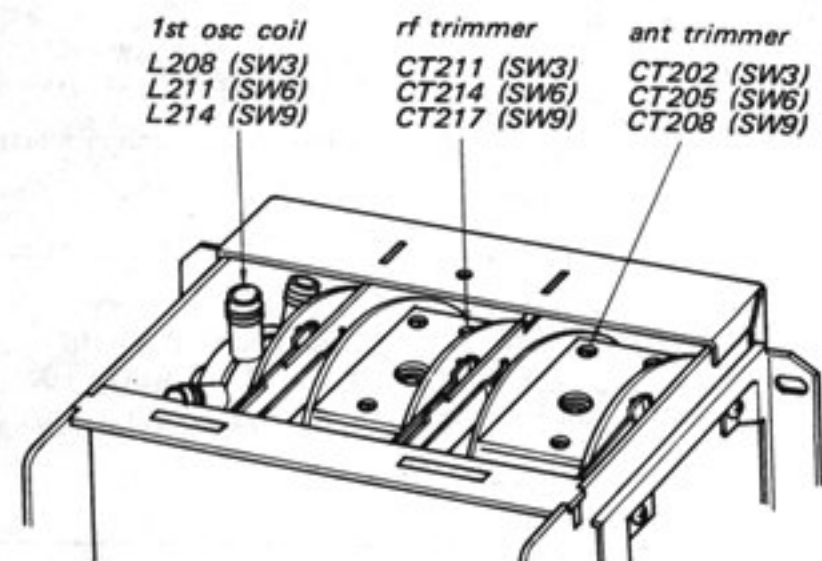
Adjusting parts for SW3, SW6, SW9
